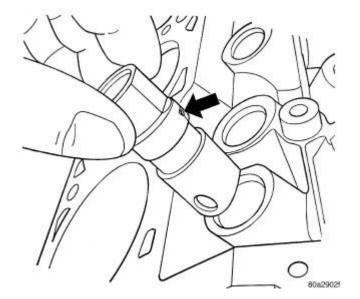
LIFTER LUBRICATION HOLE Courtesy of CHRYSLER LLC
